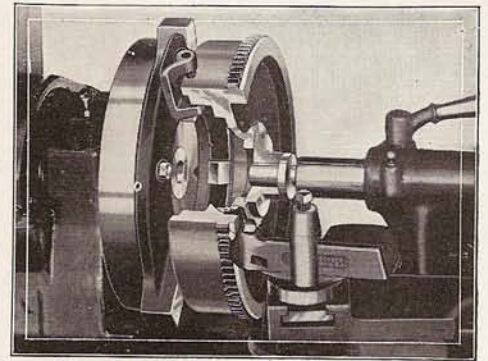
Section View Showing Method of Mounting and Centering Flywheel in Lathe for Machining.
